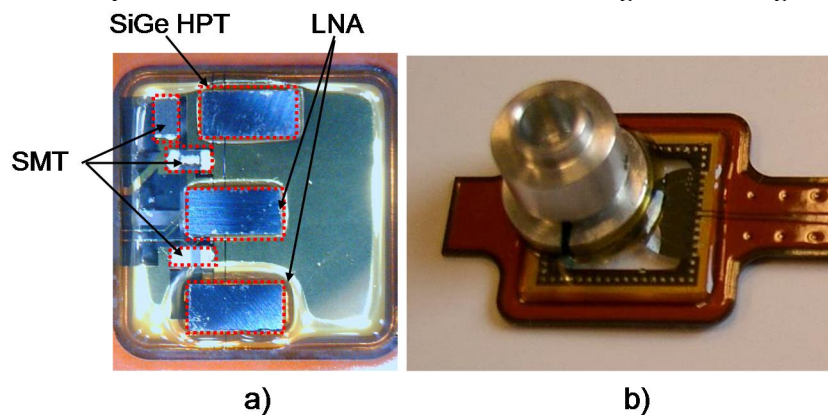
SiGe ROSA final integration and packaging: a) bottom view with electrical interconnections; b) Top view with optical mechanical receptacle mounted on the flex PCB
